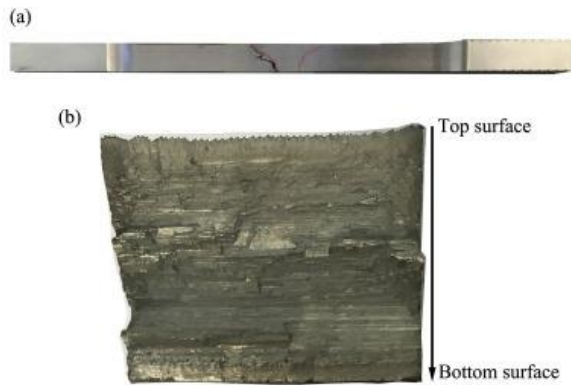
Tensile result of transverse section of the full weld: (a) fracture position; (b) fracture surface.
